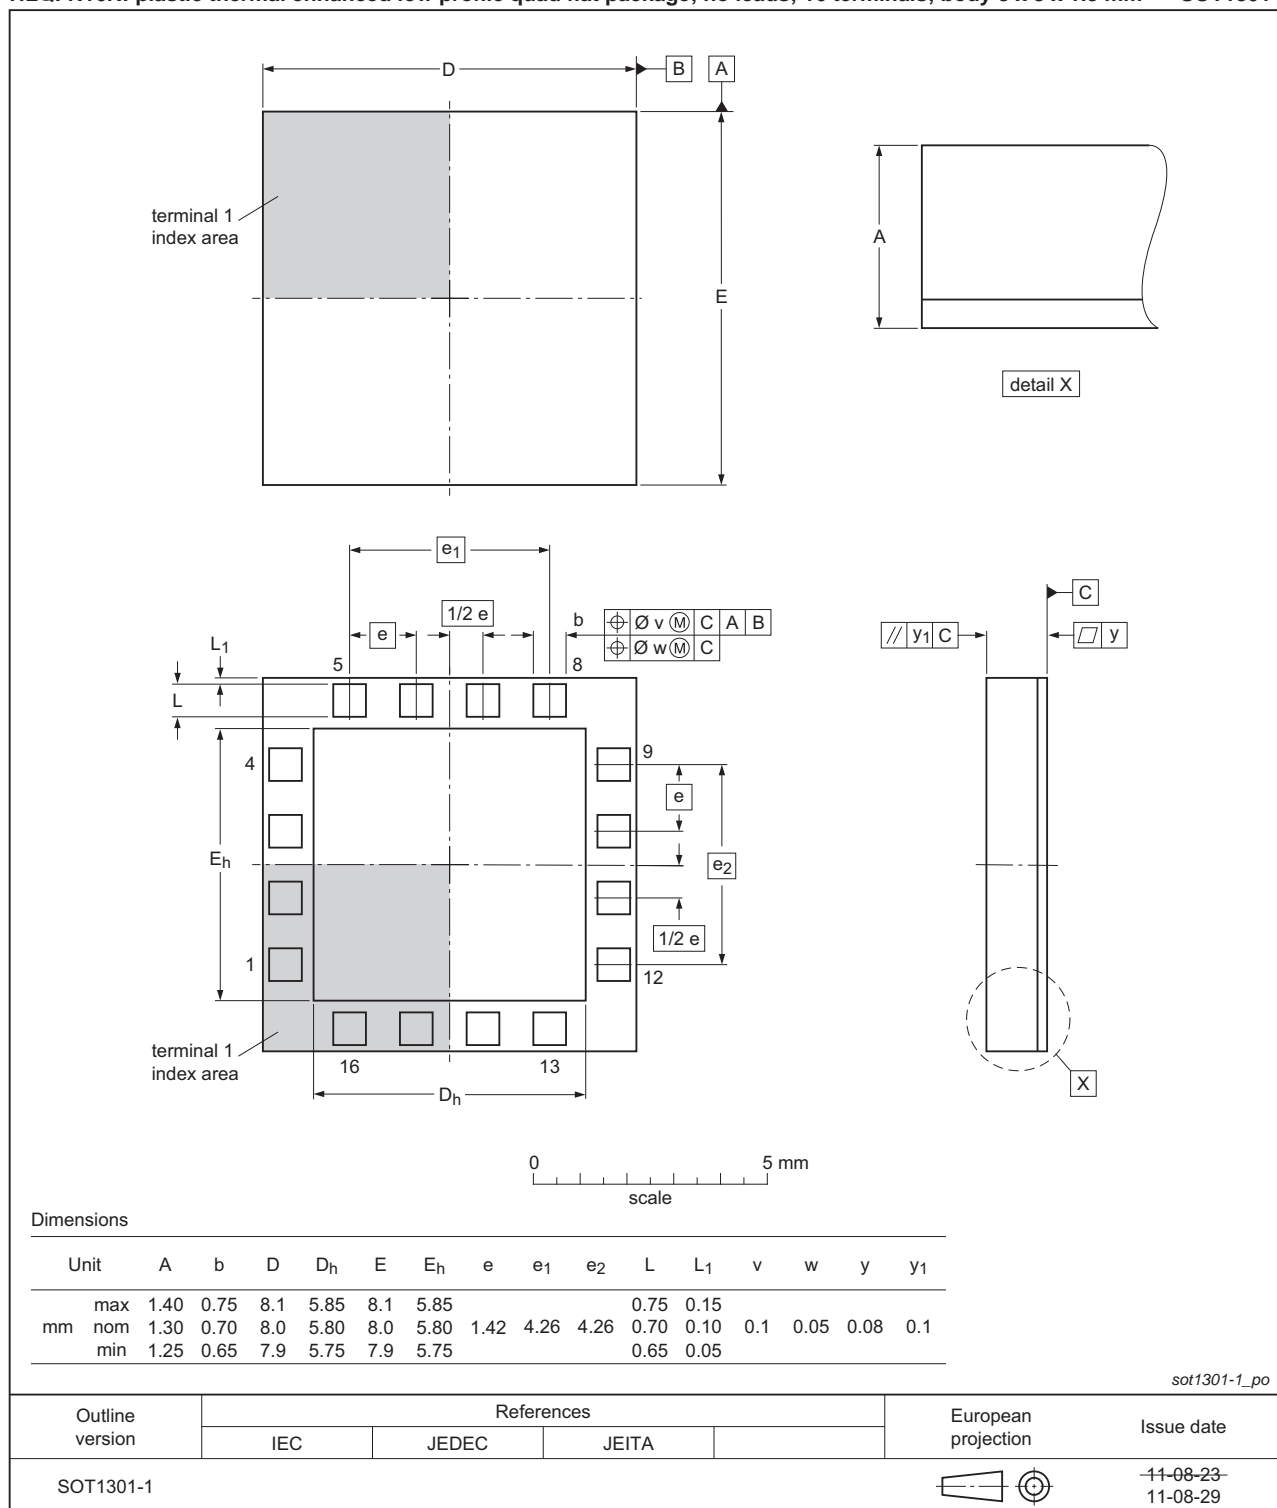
Package outline SOT1301-1 (HLQFN16R)
